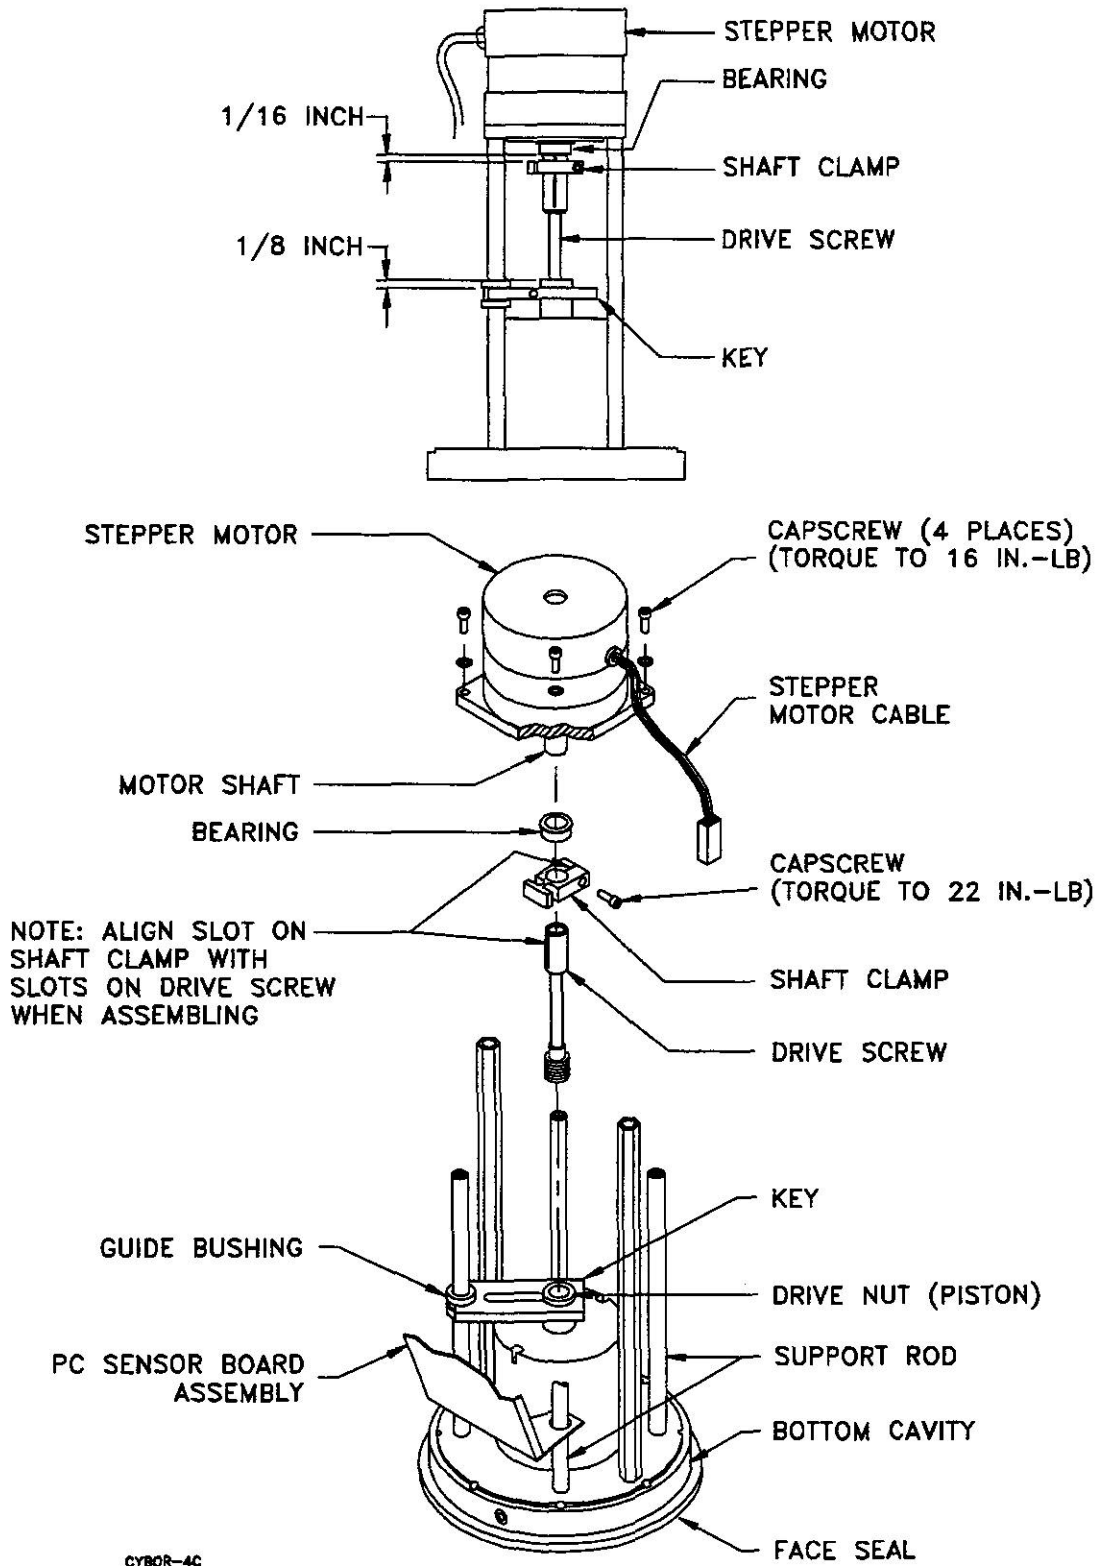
Stepper Motor, Drive Screw, and Bearing Removal and Replacement
